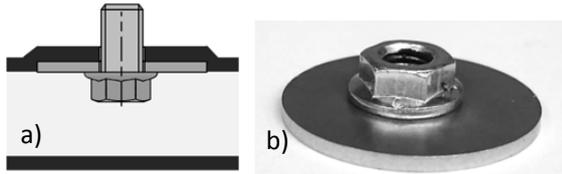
Insert geometry with foamed in M6 flange nut and 2mm thick metal plate with a 30 mm diameter above.
